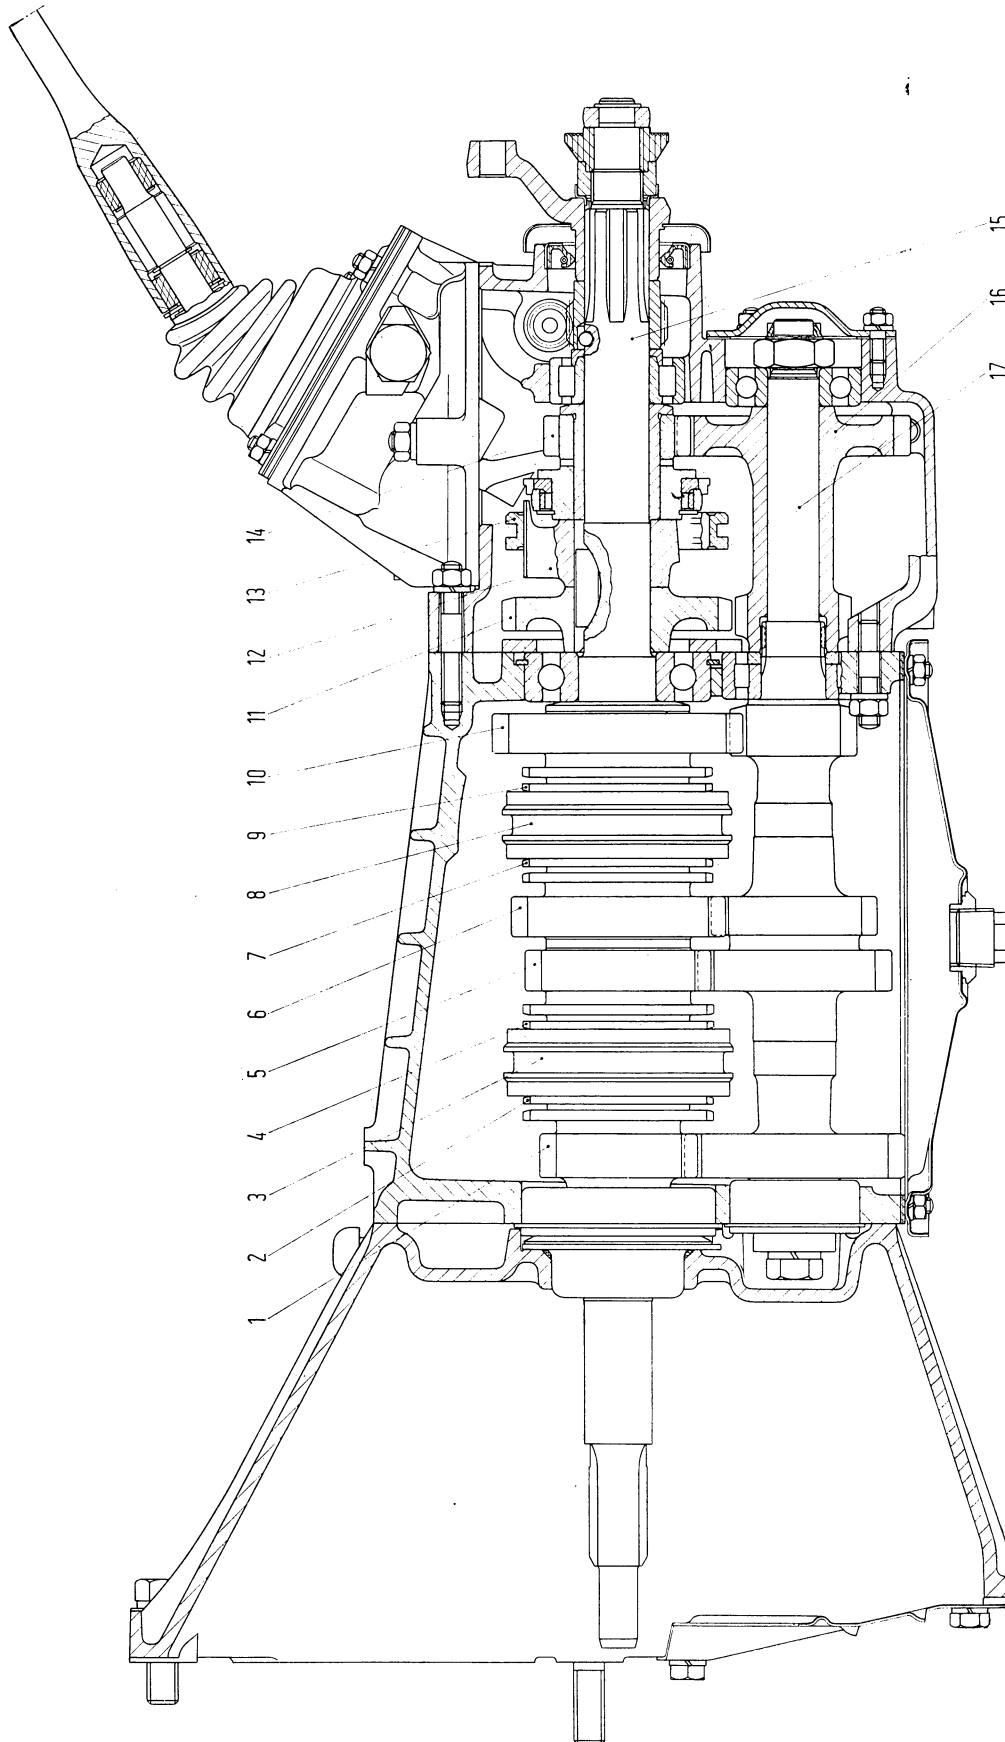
Side sectional view of 1500 Cabriolet transmission across overdrive and reverse gears. Transmission to suit 1600 S Cabriolet differs from the assembly shown here above in the maincase and bell housing design.
